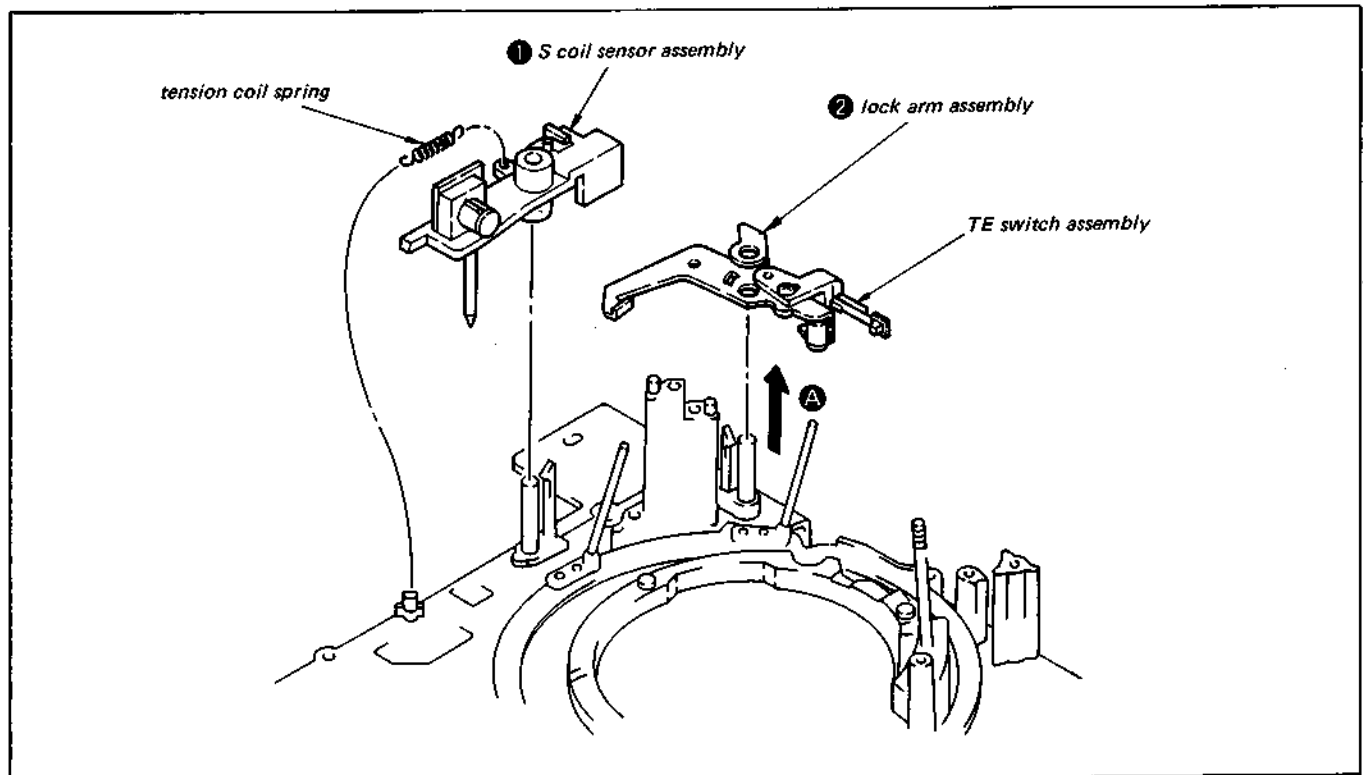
Removal of the TE switch assembly and lock arm assembly
